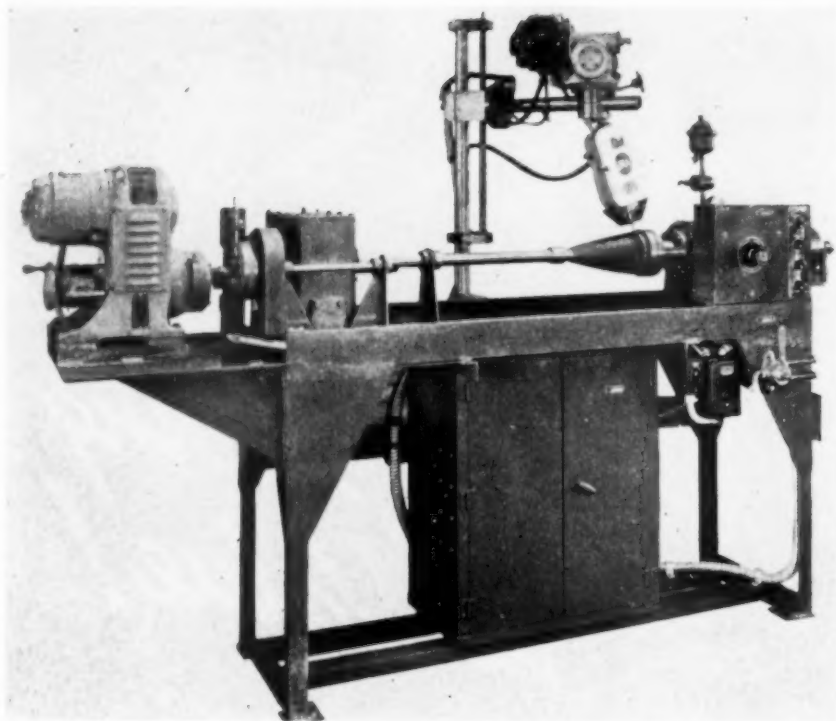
An advanced type of high production welding fixture for uniform rotation work with head stationary.
